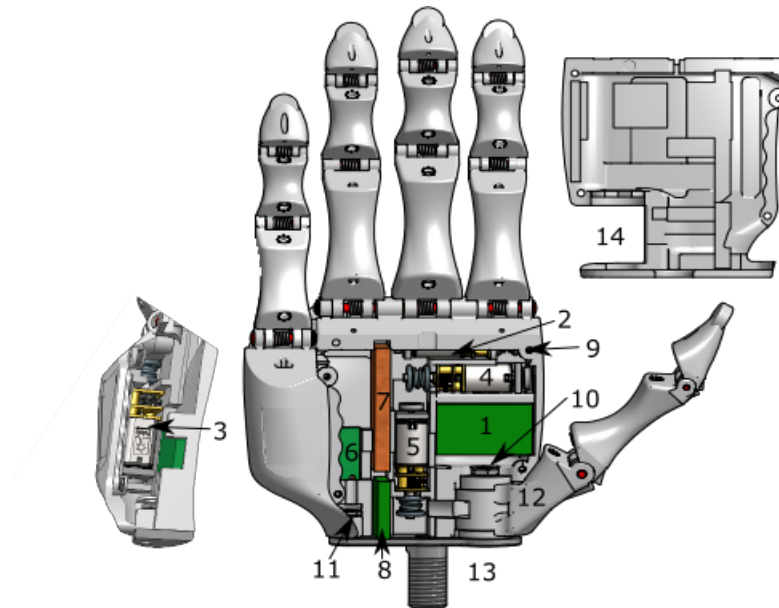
Assembly of Prosthesis (Illustration: LC Theron)
